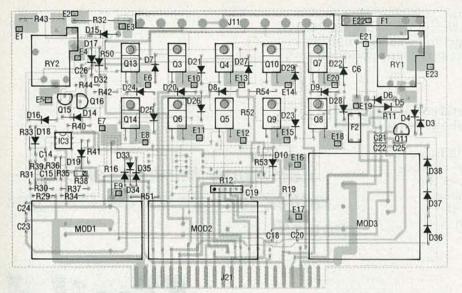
PARTS PLACEMENT DIAGRAM for the power board. Remember that several components must be mounted on the solder side of the board to leave room for the other components (see text).
